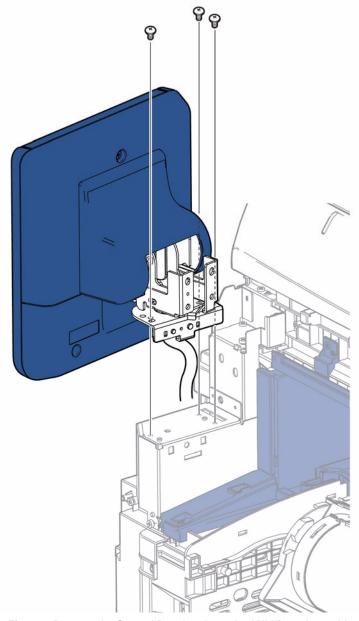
Remove the Control Panel and attached UI Hinge Assembly
